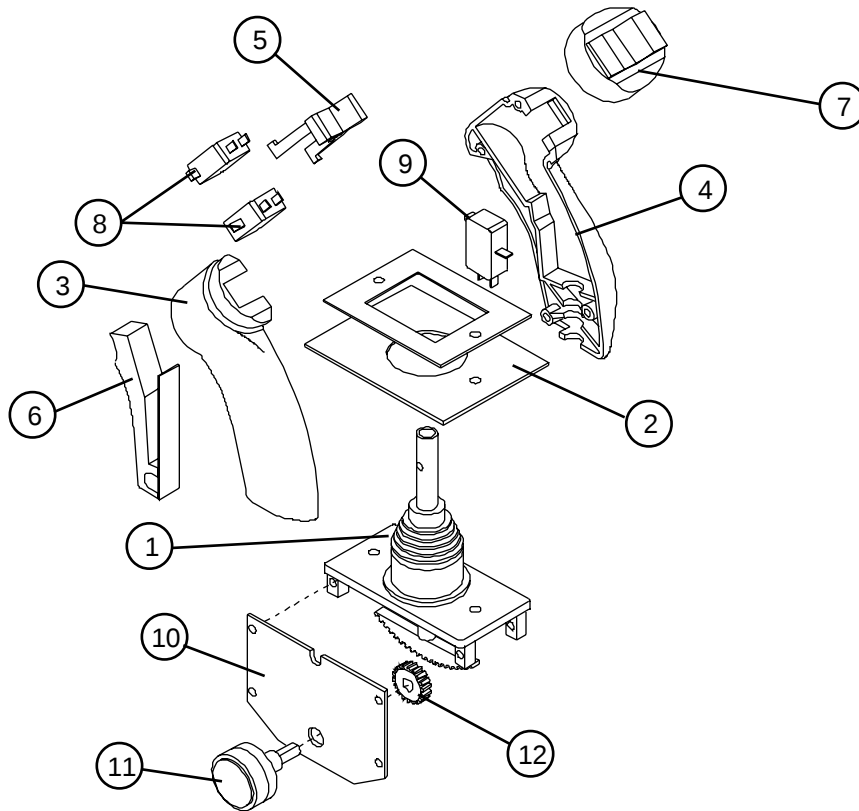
OPERATOR'S CONTROL CONSOLE ASSEMBLY
